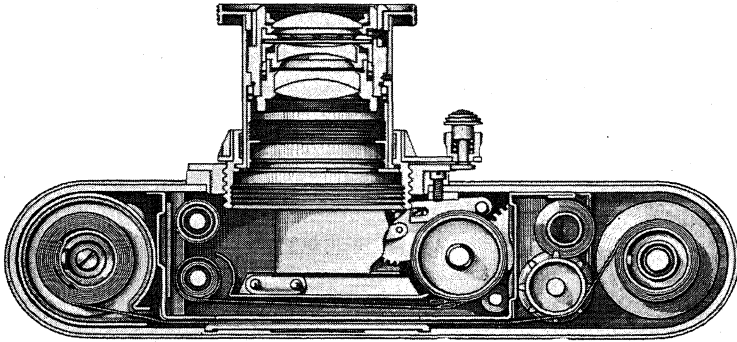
Top cross section view of the Leica showing position of the film focal plane shutter, lens, and other working parts.
